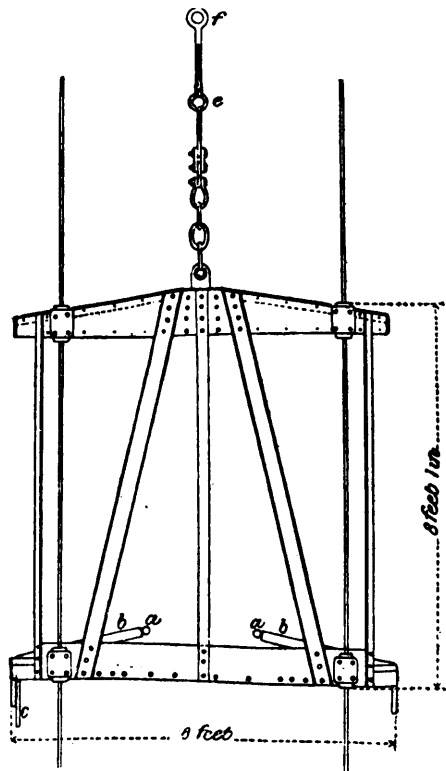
ELEVATION OF CAGE, NO. 1 PIT, LLANBRADACH.
